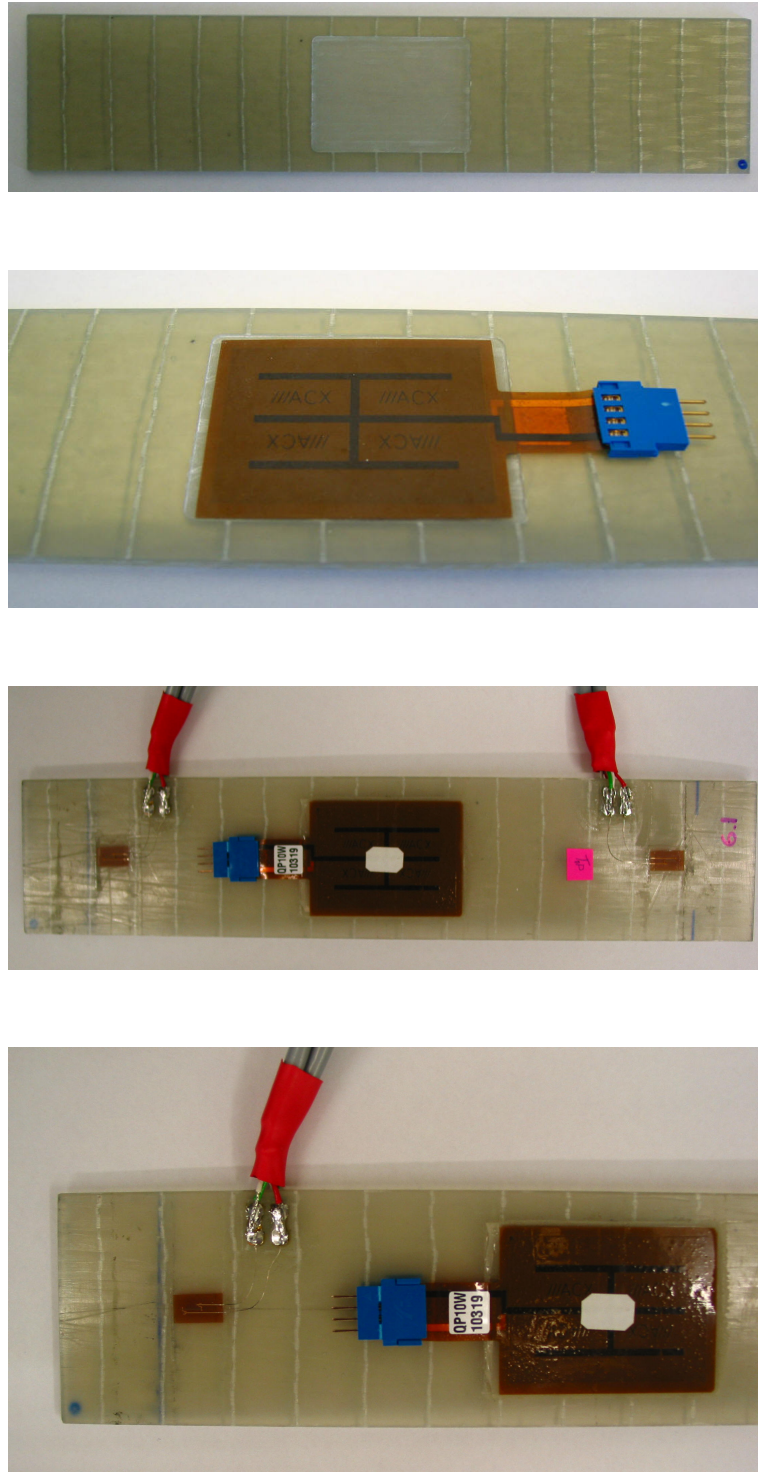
Photos of Plate Strip A during construction, starting with the machined blank at the top to the finished active plate strip at the bottom.
